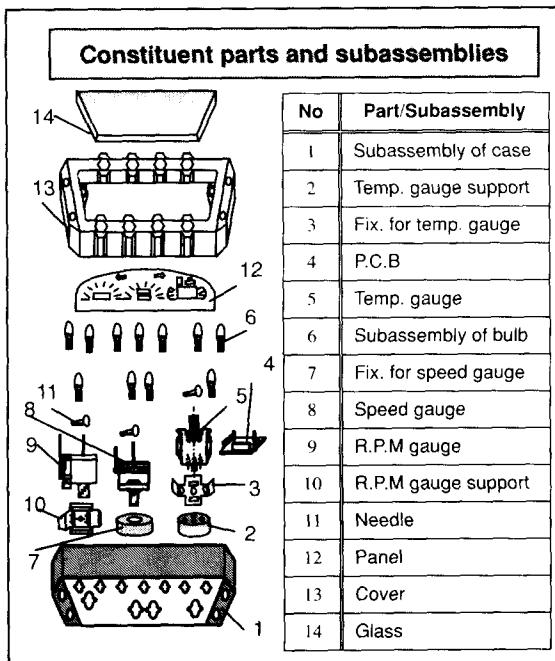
Constituent parts and subassemblies for the subassembly of cockpit of an automobile
